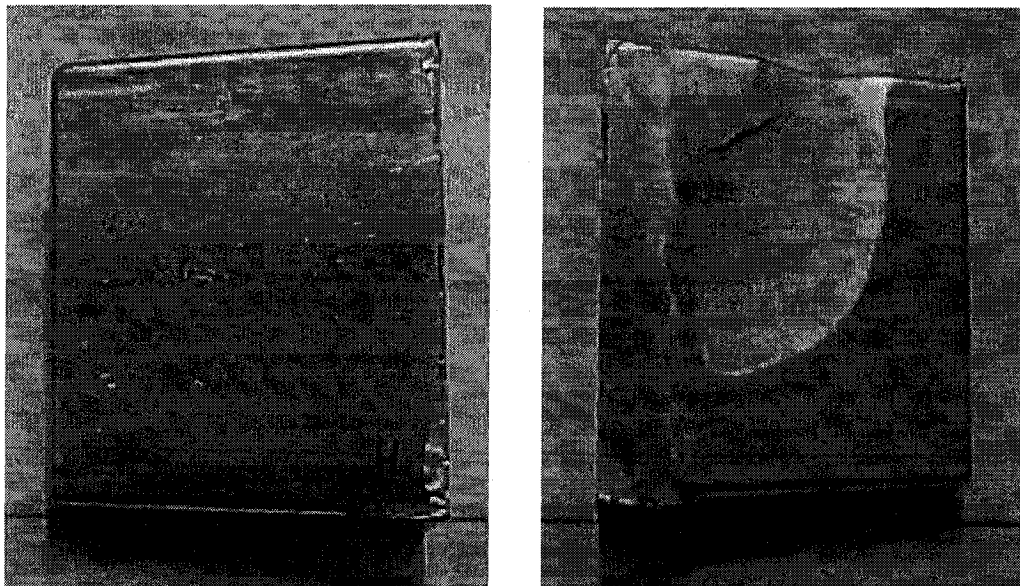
Aluminum casting produced with heat pipe cooling (H2)
